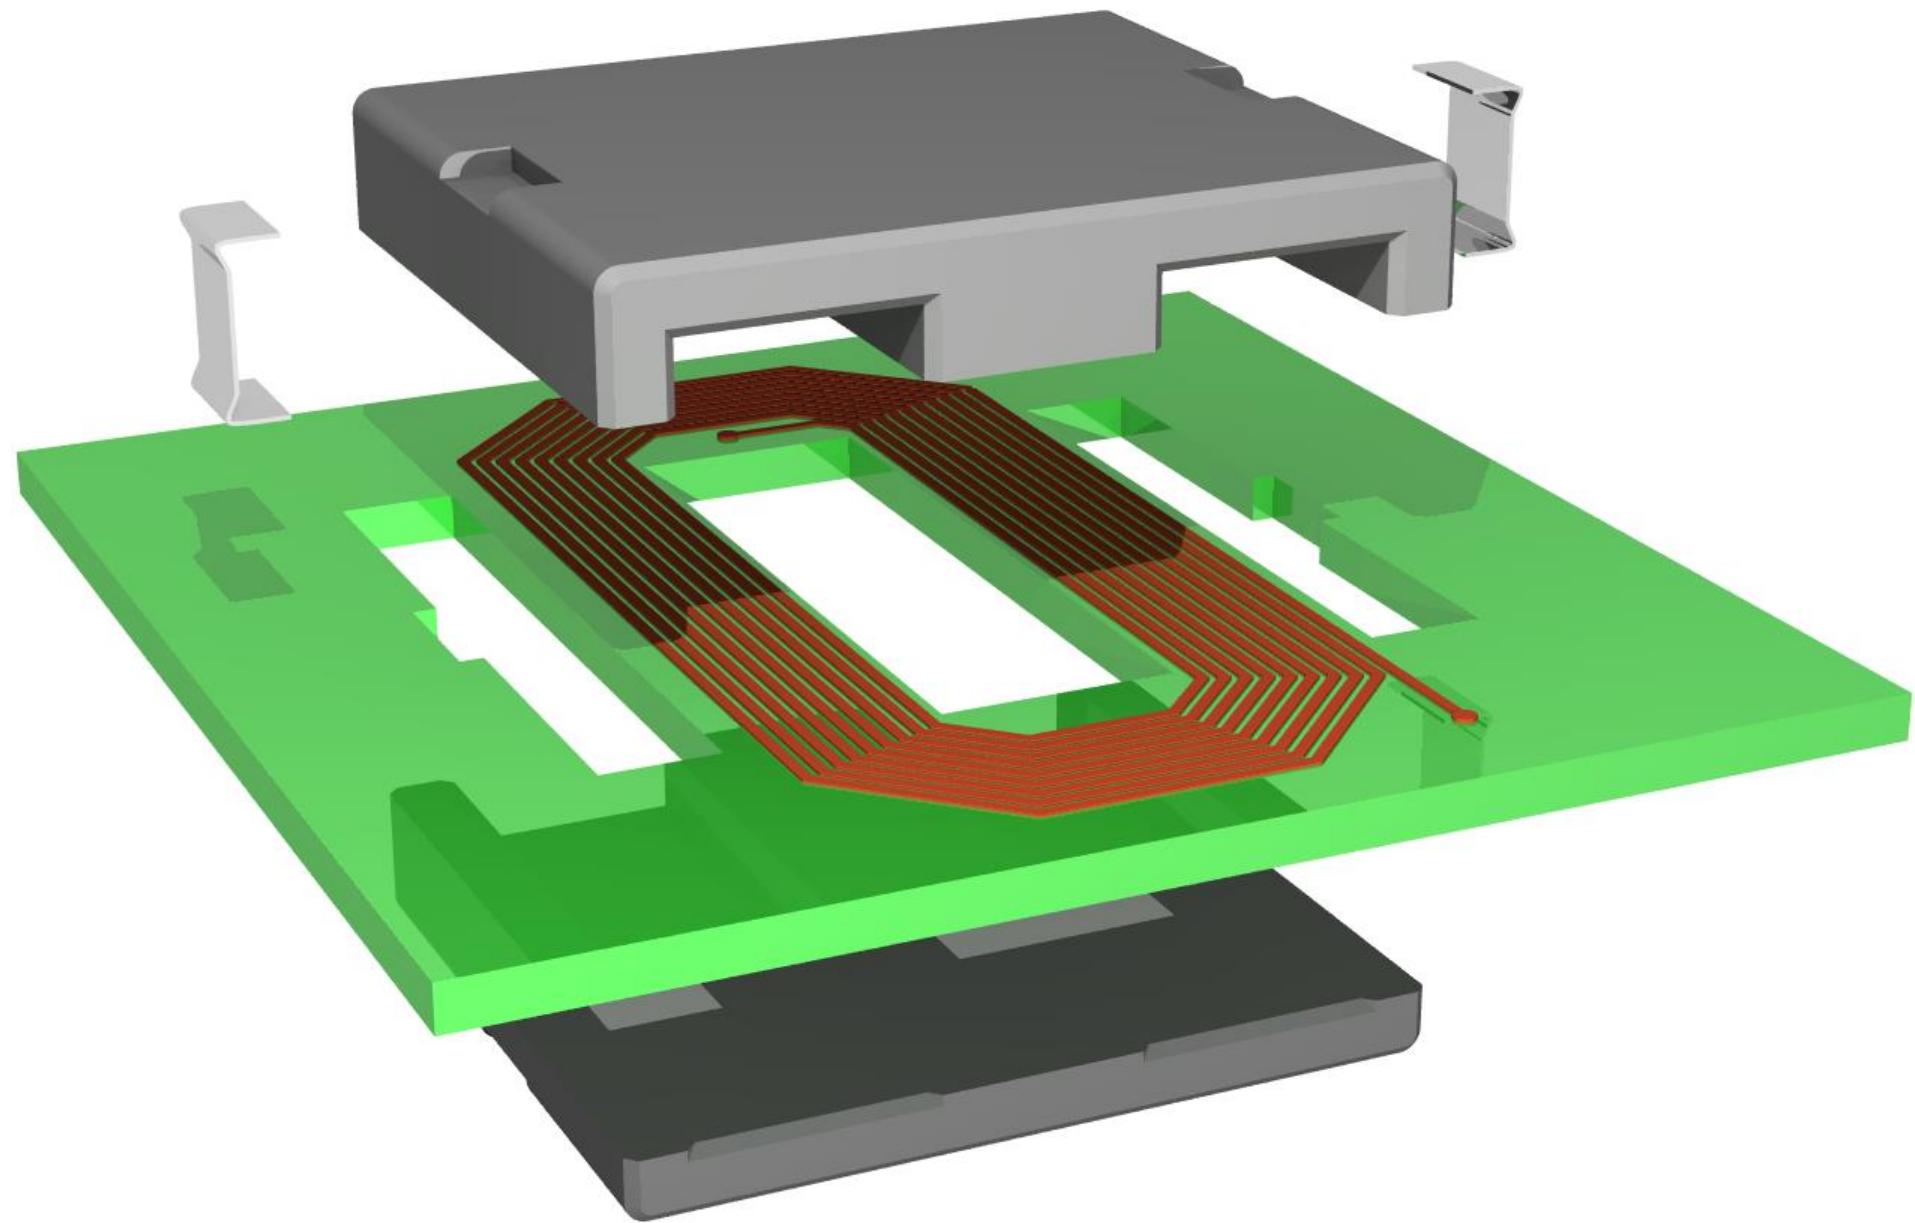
3D model of the coil system with 10 copper windings on a FR4 PCB board. For improved visibility, only one copper layer of the coil is shown.
